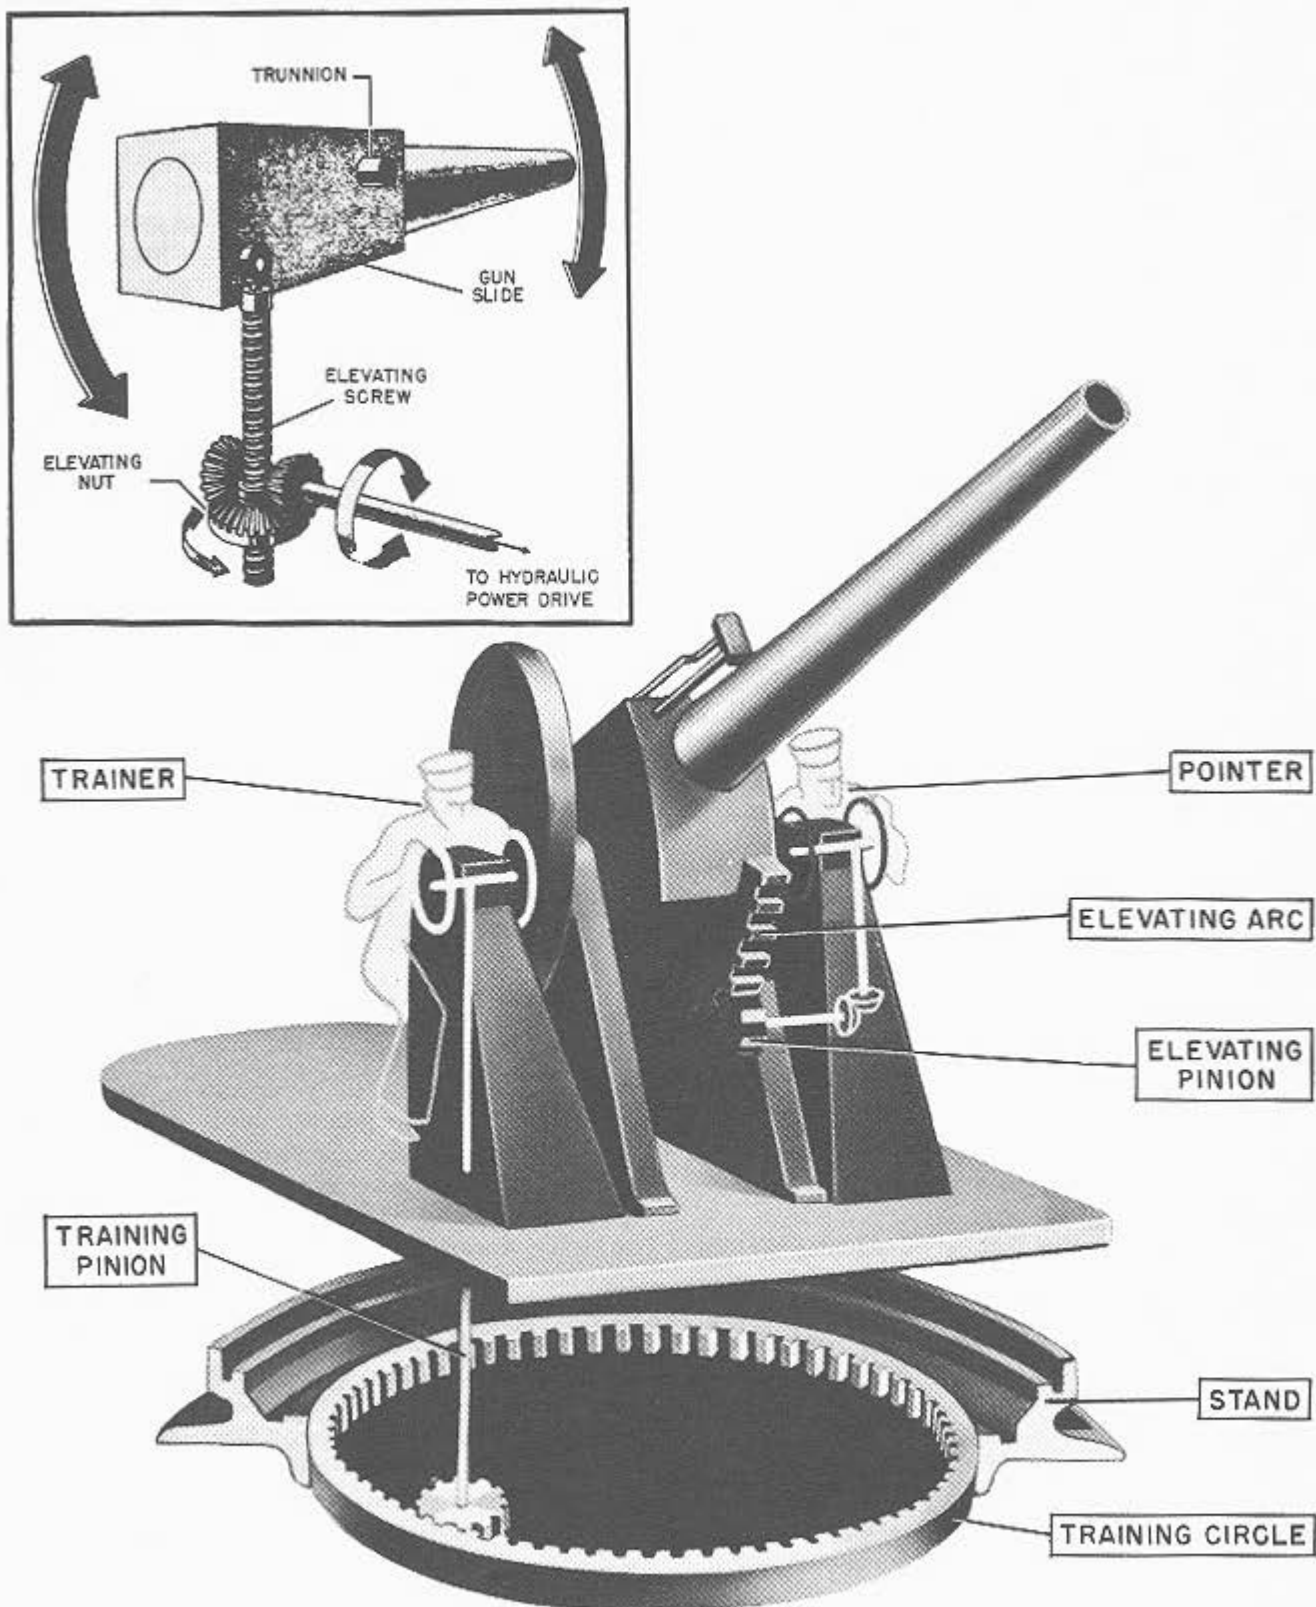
B34.—Training and elevating gear. (Inset: Screw-type elevating gear.)
